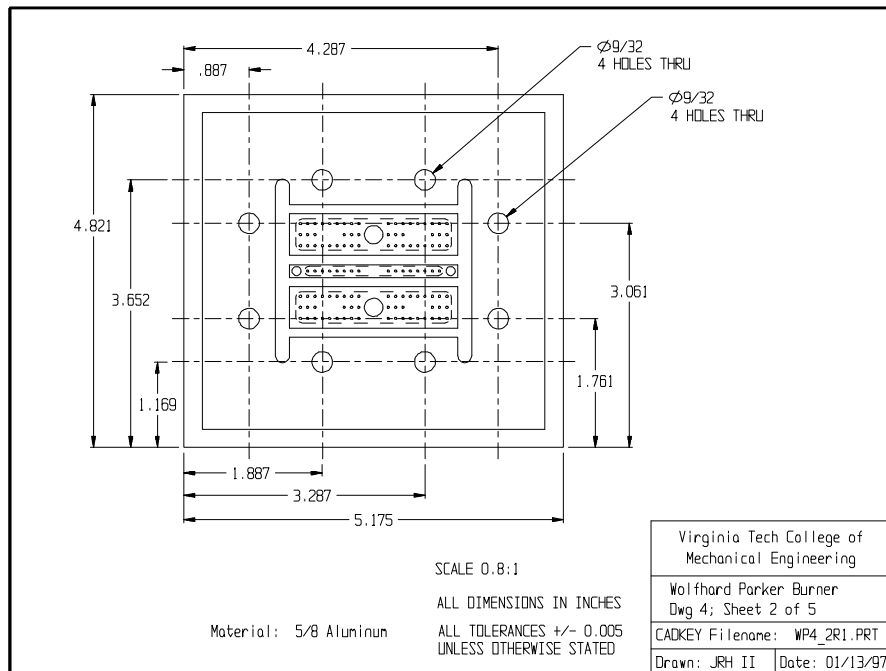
Burner Mounting Base, Drawing 4 Sheet 2 of 5
